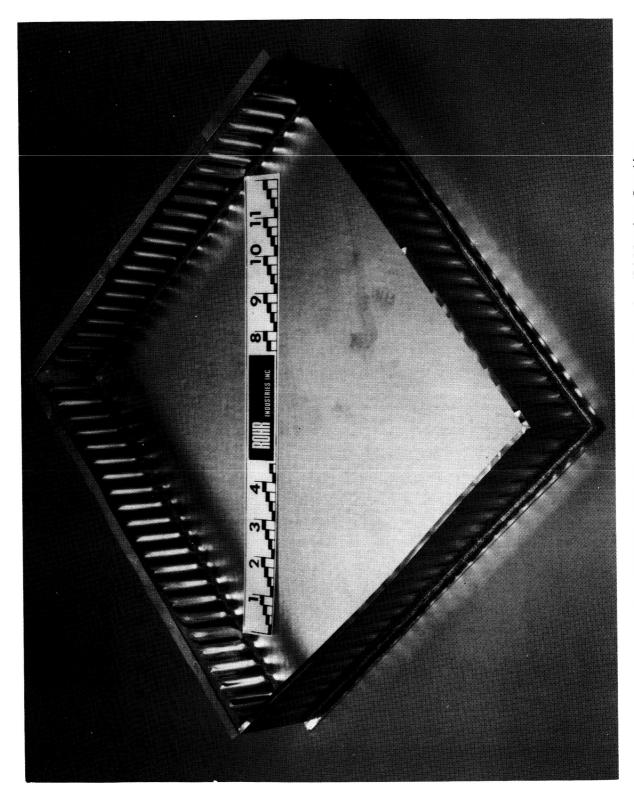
INCONEL 617 Subassembly after Brazing/Diffusion Bonding
